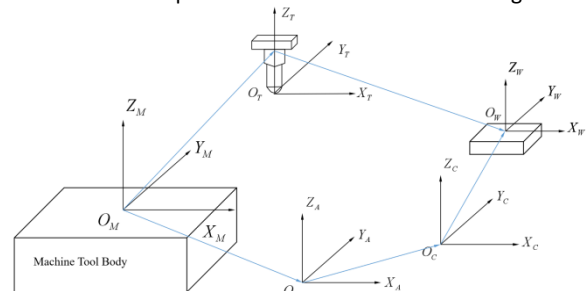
Coordinate system of A-C double-turn machine tool each part.
